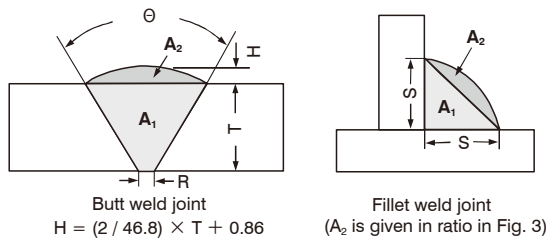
Weld sizes ( $\theta$  in deg., H, R, S, and T in mm)
